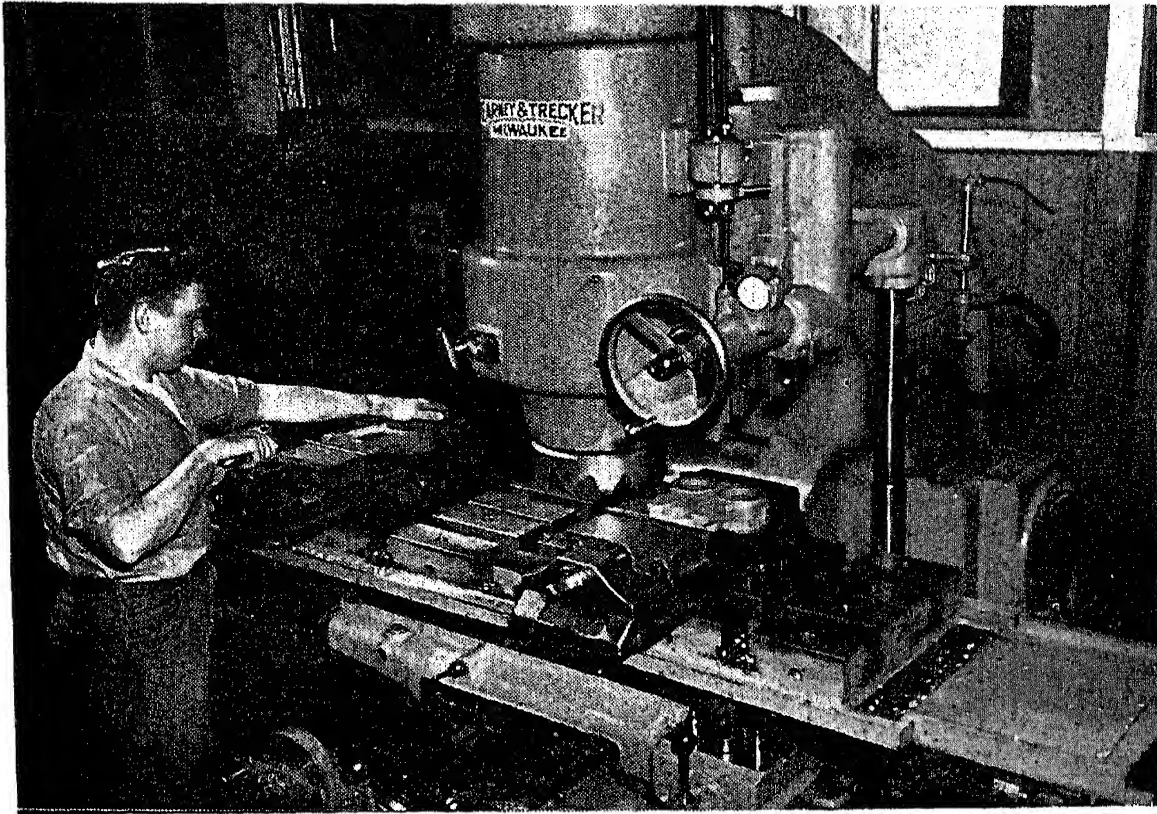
A model CSM vertical milling machine engaged in face milling arbor supports. (Courtesy Kearney and Trecker Corp.)
